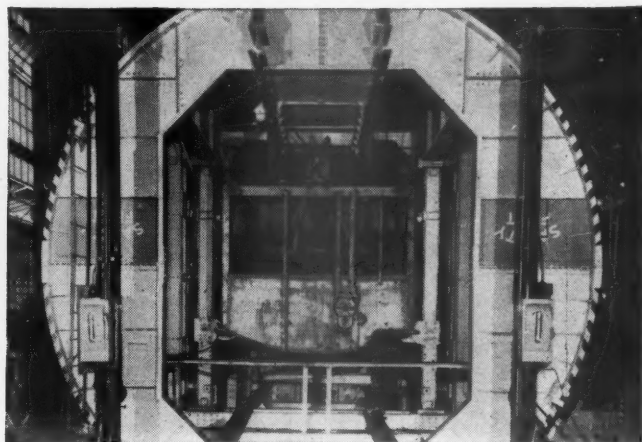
Hopper car held inverted in "turn-over" type fixture to allow fast, low-cost arc welding with "Automatic Lincolnweld" process.
